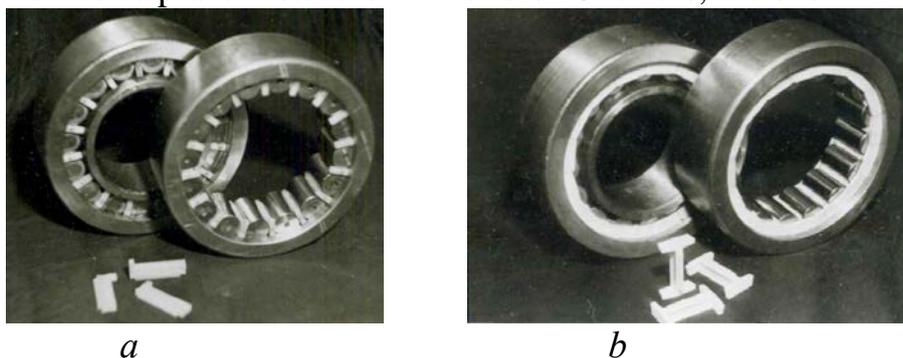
Roller bearings type 2726 with the split designs of polyamide spacing rings:
